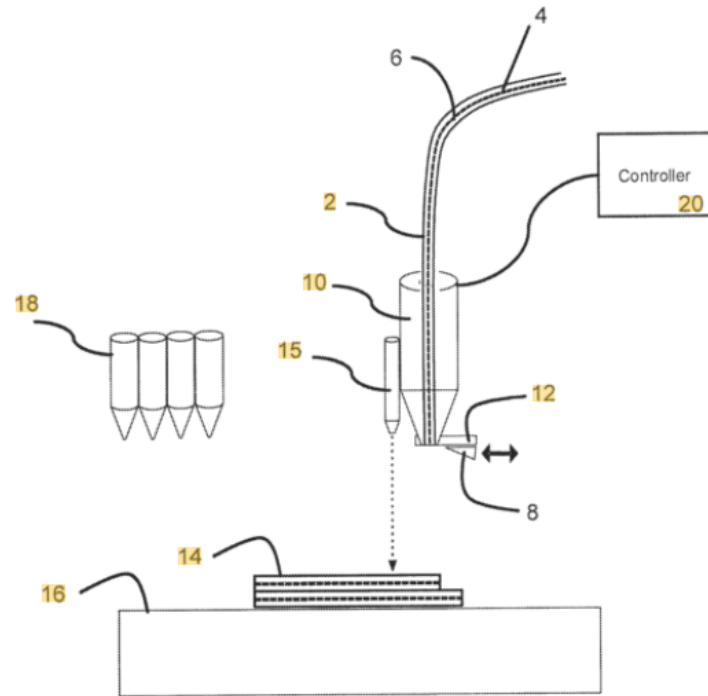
Nozzle and extrusion apparatus for additive manufacturing of CCF [42].
